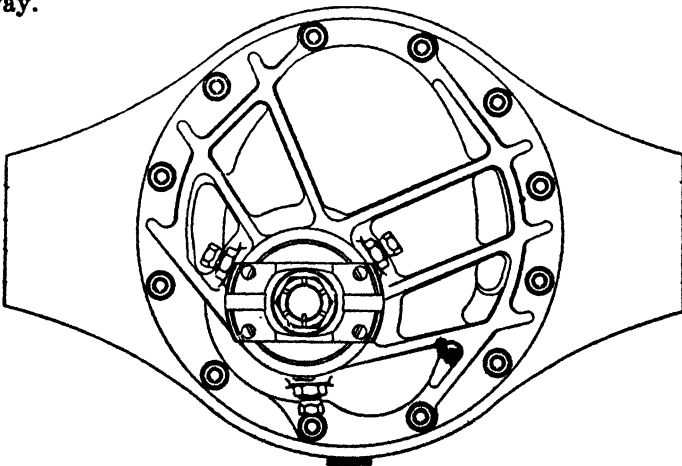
FRONT VIEW OF HYPOID-GEAR CARRIER.
